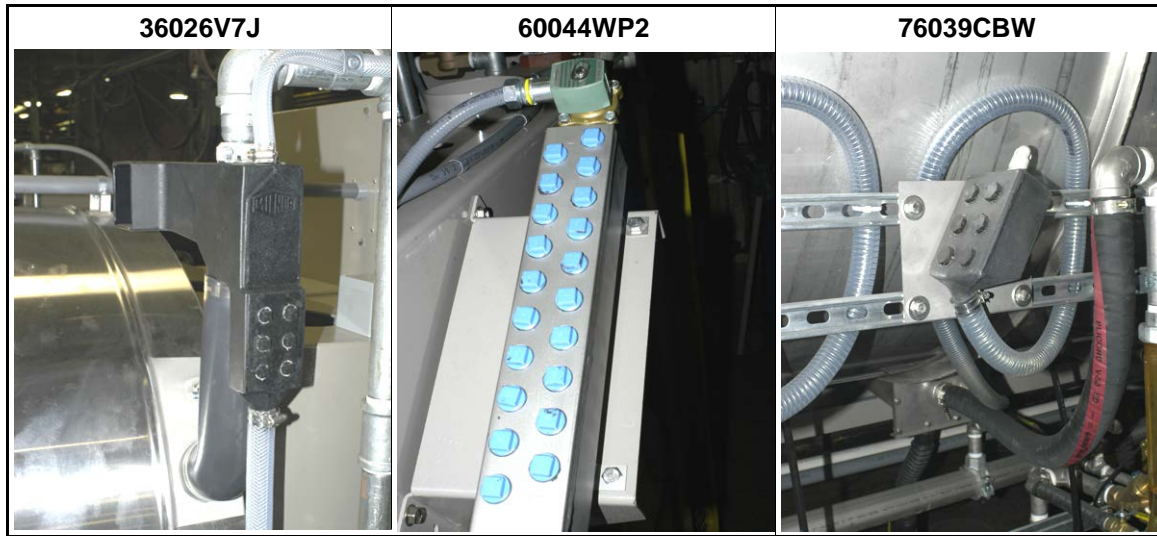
Electric Box and Inverter. These are examples. Your machine can look different.
